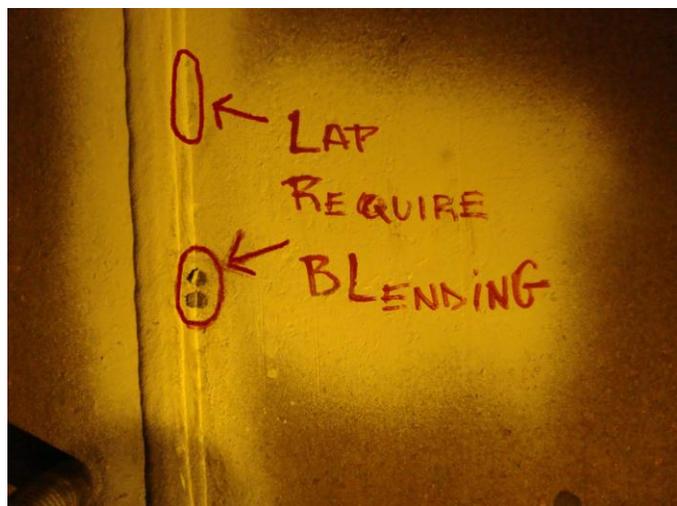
Circumferential weld seam exhibiting discontinuity.
